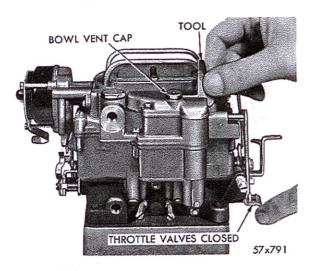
Checking Bowl Vent Cap Adjustment Using Tool T-109-197
